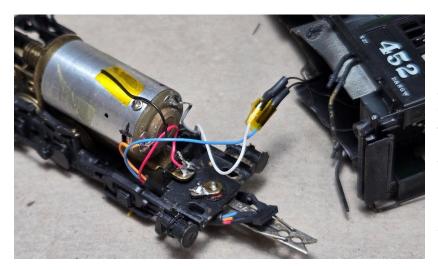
The wiring harness sits above the drawbar, and is centered, 3 wires on a side, around the drawbar. The gray (-) and orange (+) wires are soldered to the motor, and the red wire (right rail pickup) to the loco frame. The blue and white wires go to the headlight.
